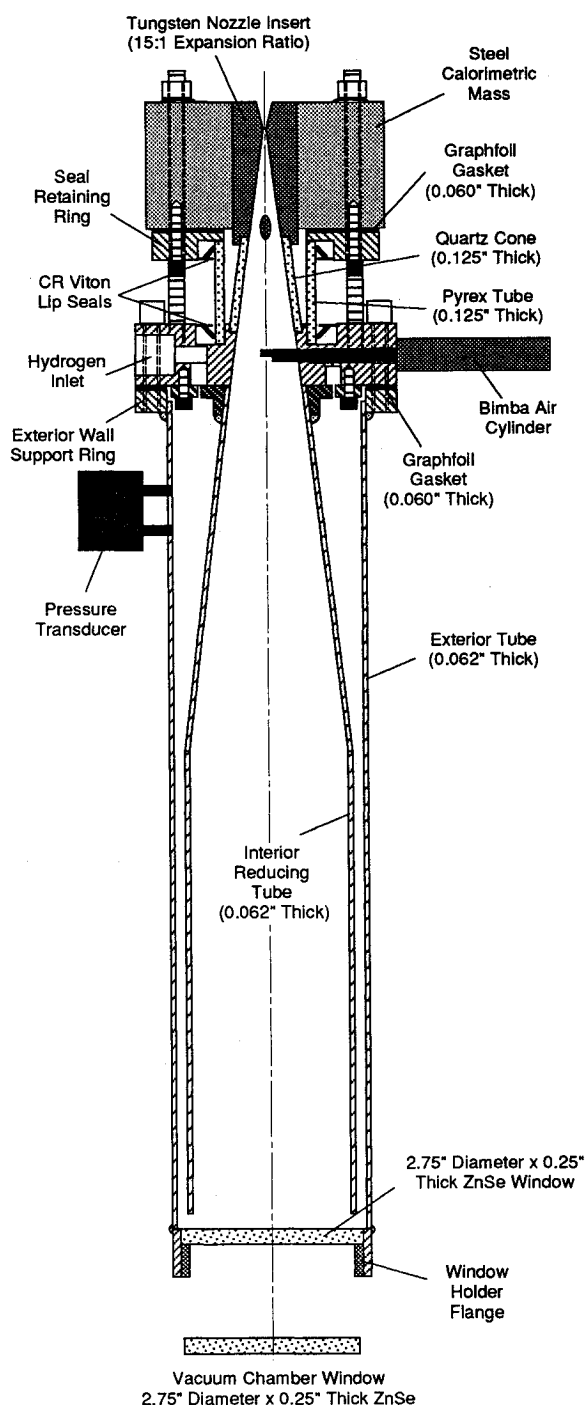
Design drawing for the 10-kW laser thruster unit.
